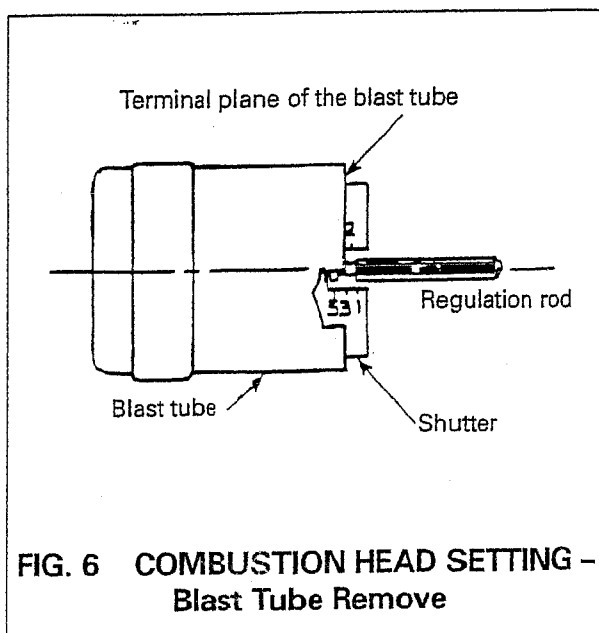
COMBUSTION HEAD SETTING - Blast Tube Remove
